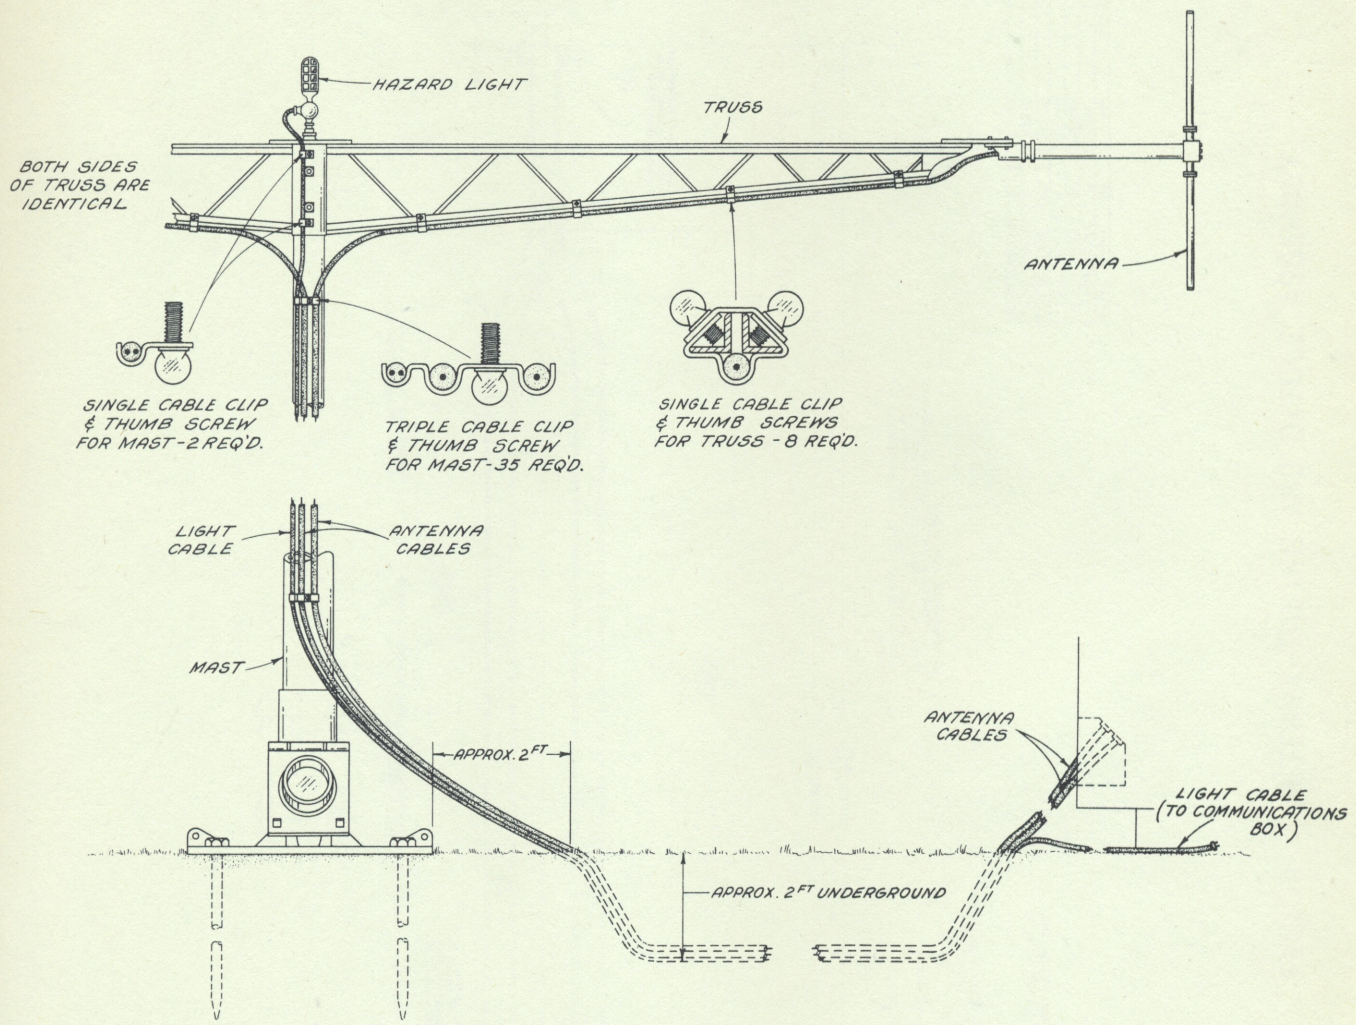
ANTENNA EQUIPMENT RC-81-A, INSTALLATION
